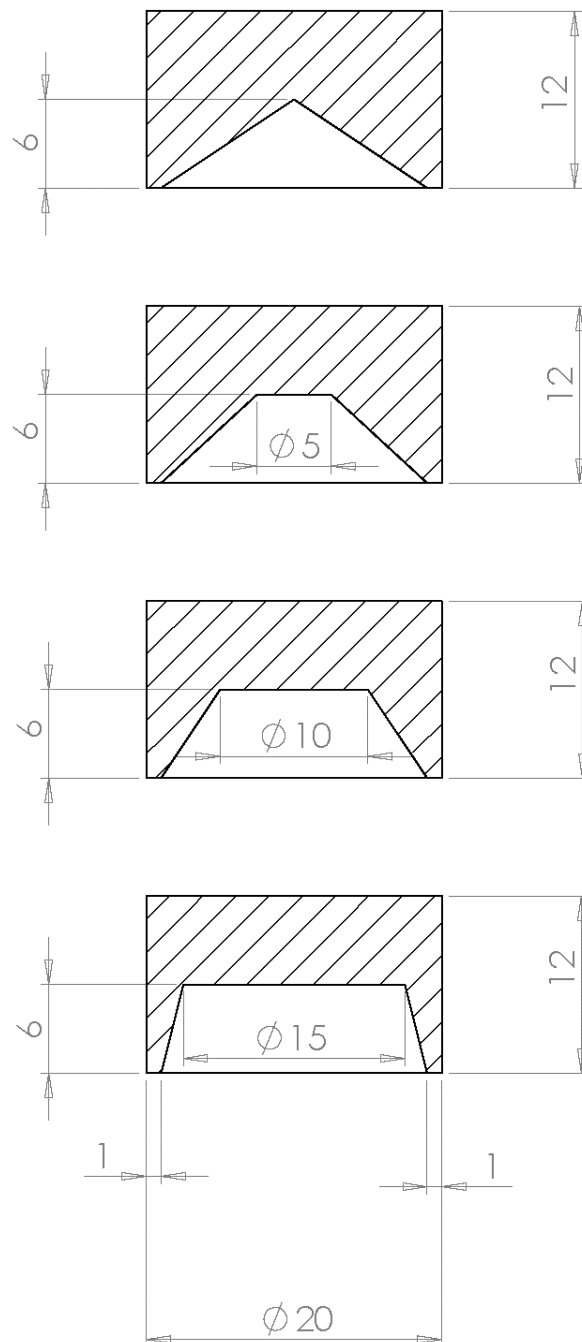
Technical drawing showing the dimensions of the 20 mm diameter shaped graphite inserts for the 20 mm FAST mould assemblies.
